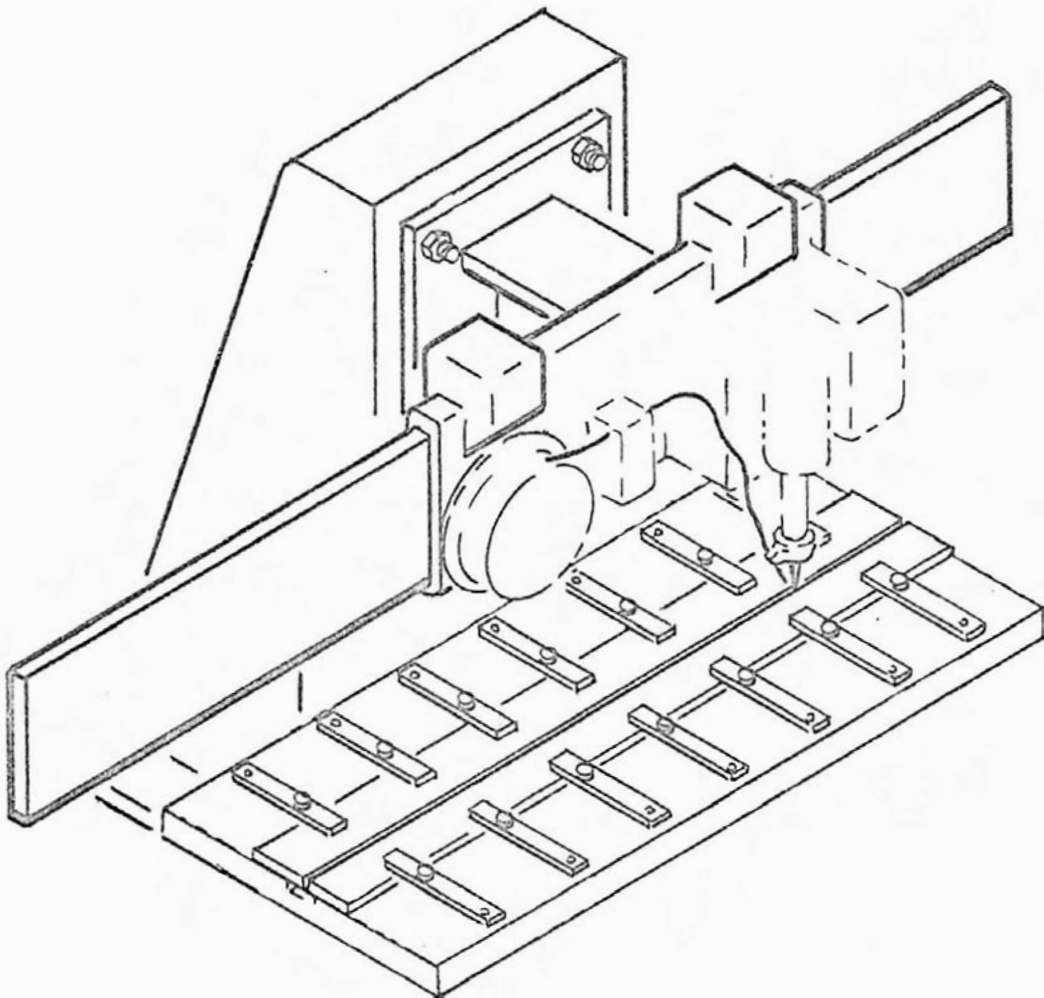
Welding Equipment Acceptance Test Weld
